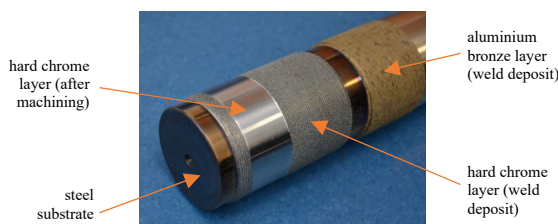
Real cylindrical specimen consisting of a steel substrate coated with a hard chrome layer and/or an aluminium bronze layer.
